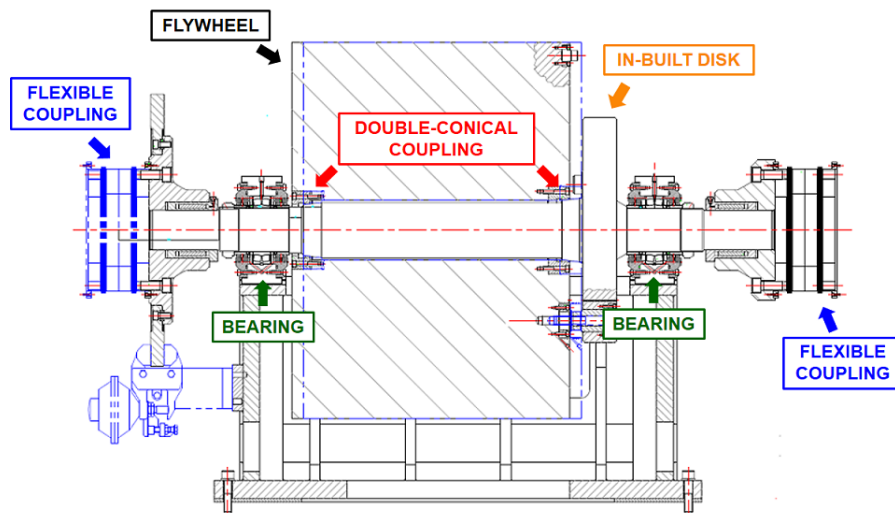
Layout of the K1 and K2 flywheel-shaft group.
